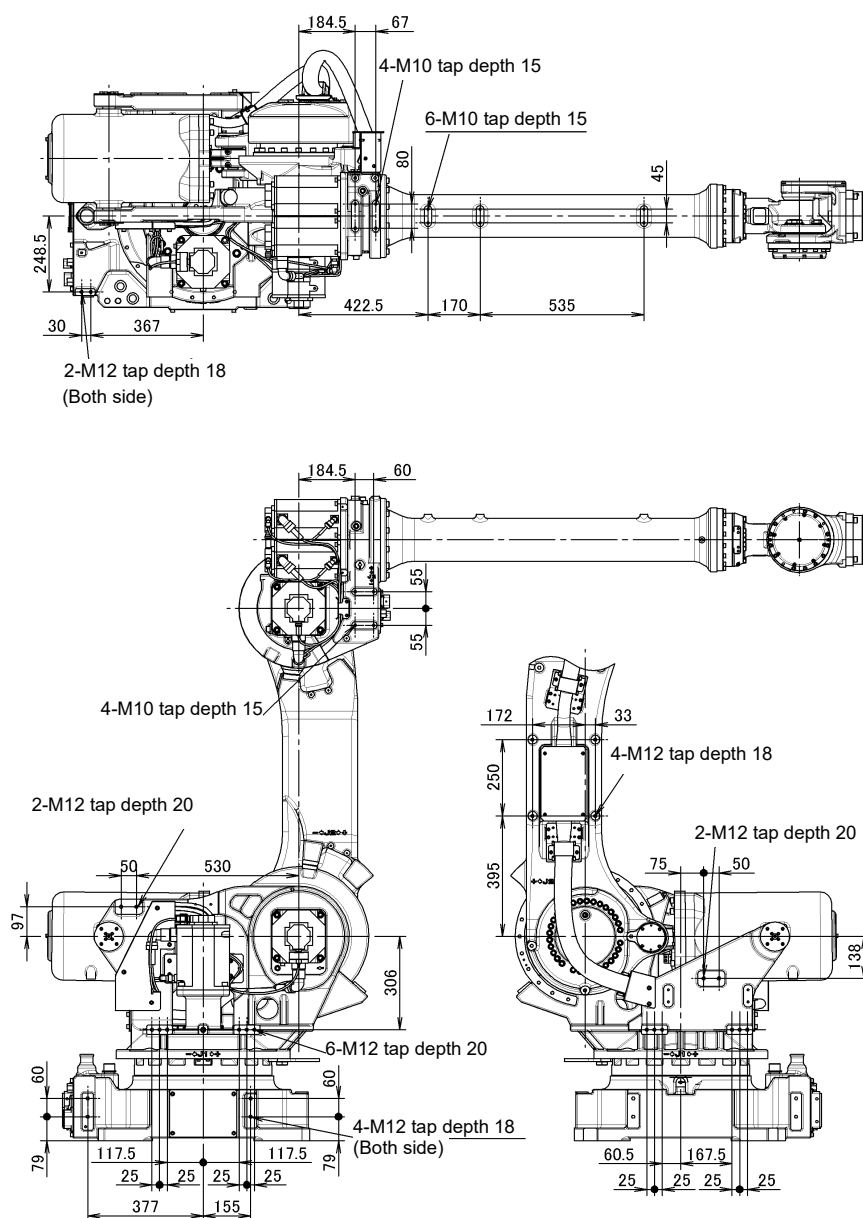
(g) Equipment mounting faces (R-2000iB/125L)
